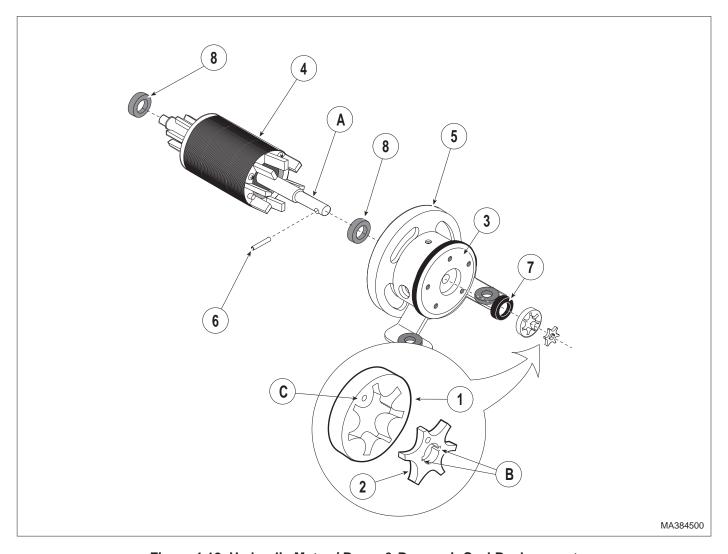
Hydraulic Motor / Pump & Reservoir Seal Replacement
